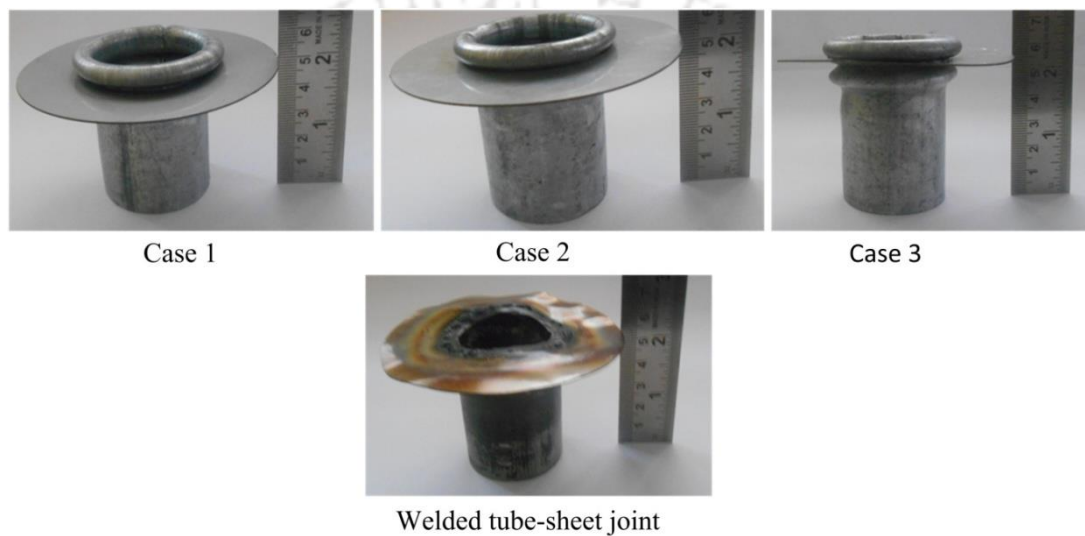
Joints fabricated with different cases as given in Table 2.4 and tube-sheet welded joint
